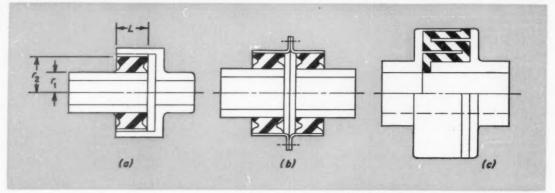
Shear-type coupling with tapered flange faces to provide constant stress in the elastomer section.
